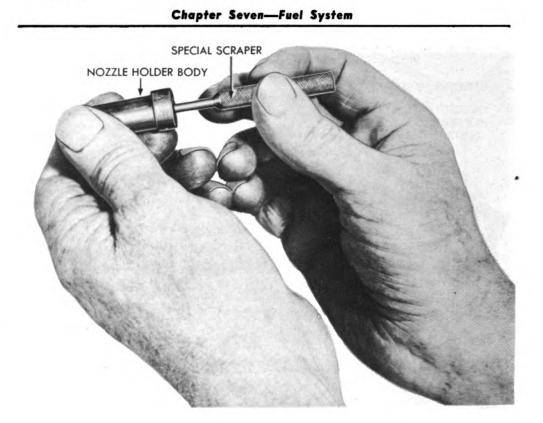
Cleaning Carbon From Nozzle Valve Seat, Using Special Scraper (17-S-250-65)
